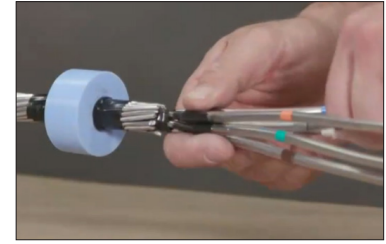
B - SS Buffer Tube being removed from under heat shrink and COT
